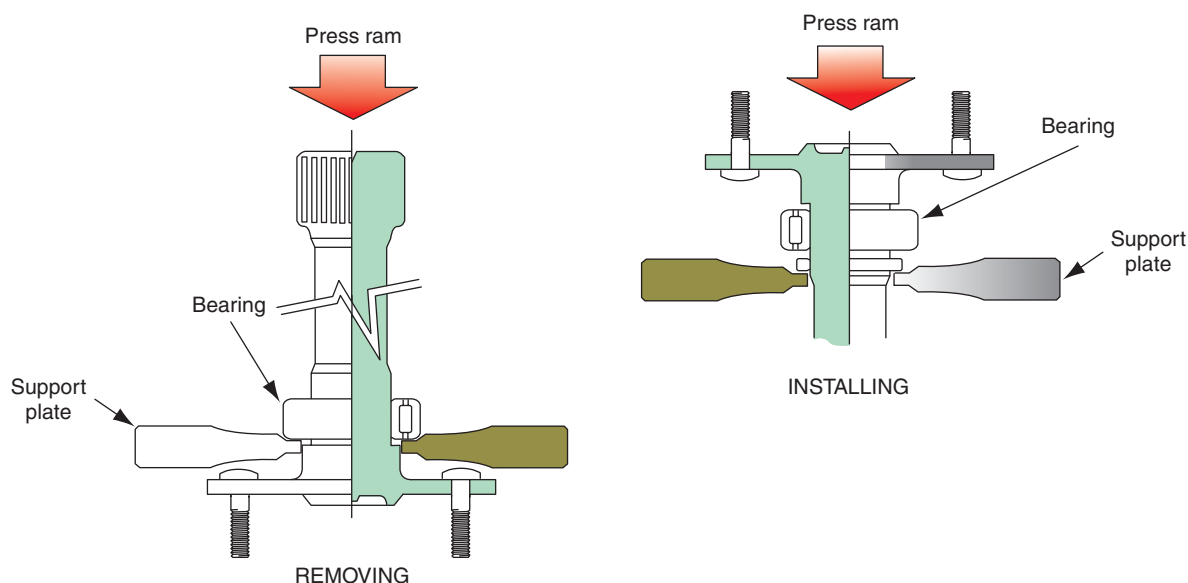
Axle bearing and adaptor ring removal and replacement.
